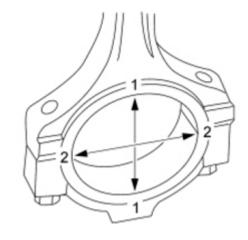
Measuring Connecting Rod Large End Bore Courtesy of FORD MOTOR CO.
